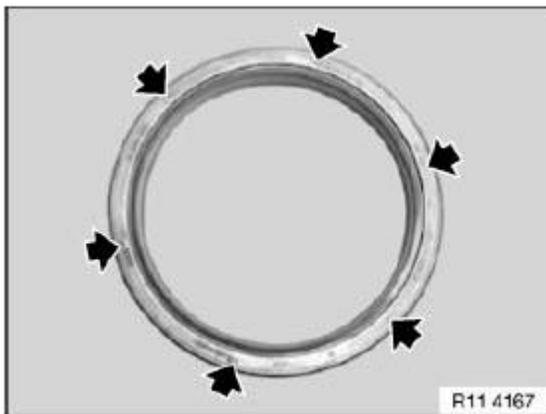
Locating Crankshaft Radial Seal Removal Openings
